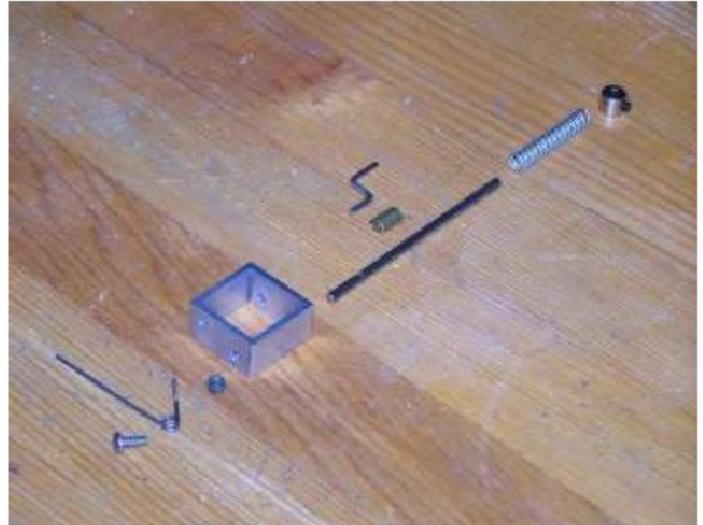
The major pieces before assembly. The S-shaped pinch wire is 1/16" diameter. The solder ferrule is made from ??? OD K&S brass tubing, flattened over the shaft in a vise. The length of the splice is the maximum that allows full shaft travel. Clean everything before assembly, then fit and tune before soldering the pinch wire onto the shaft. With this much surface area, 60/40 solder is plenty strong. Note that one collar is missing, and that the loop on the trip wire still needs to be formed. The last step is to make the spacer, mount, and drill for the mounting pin before bonding it all together.
